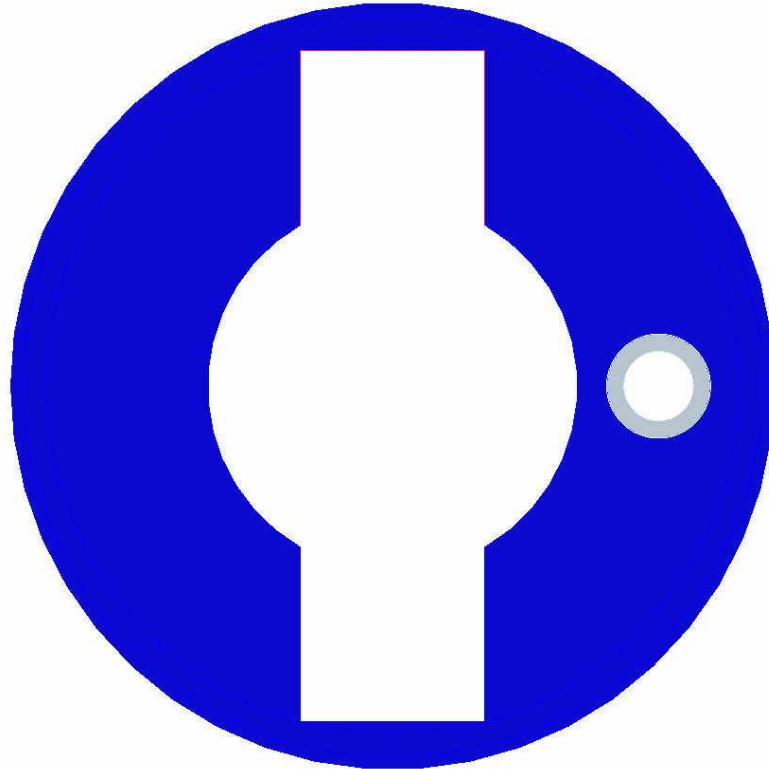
Inner Hub Re-Design - With Hardened Stainless Steel Bushing, and a Second Cut-Out for the Silicone Rubber
